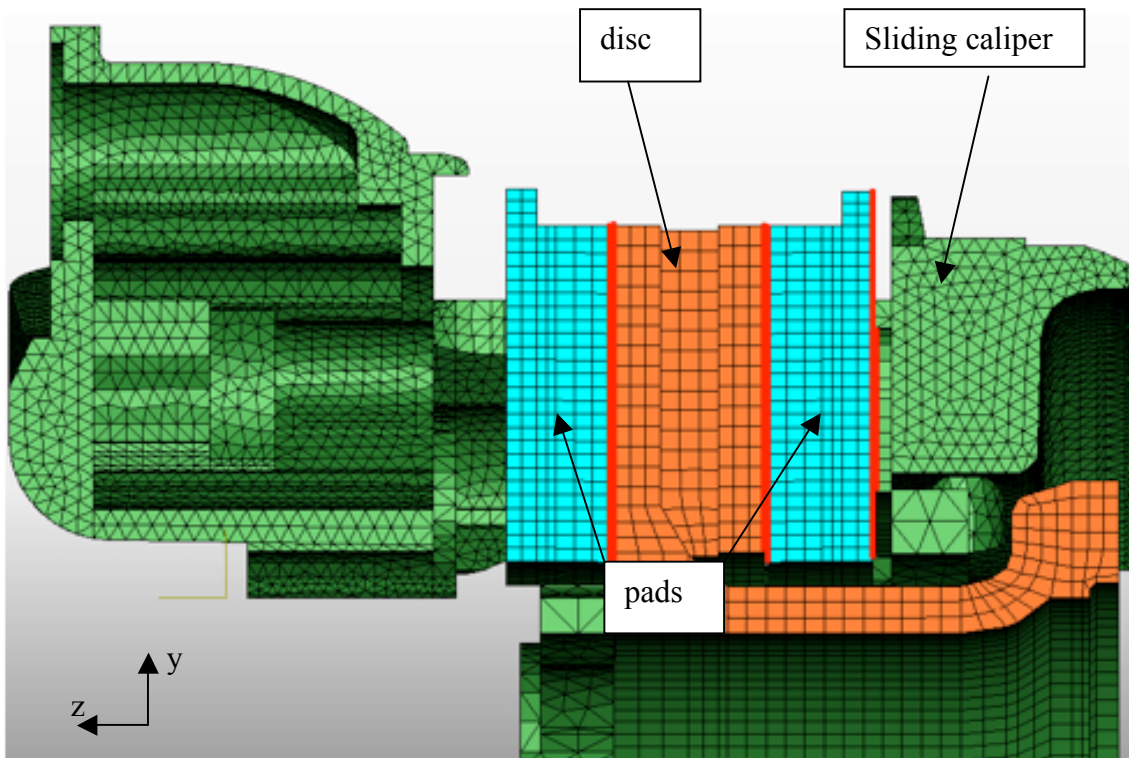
CV brake assembly, contact definition (view in the plane of symmetry)
